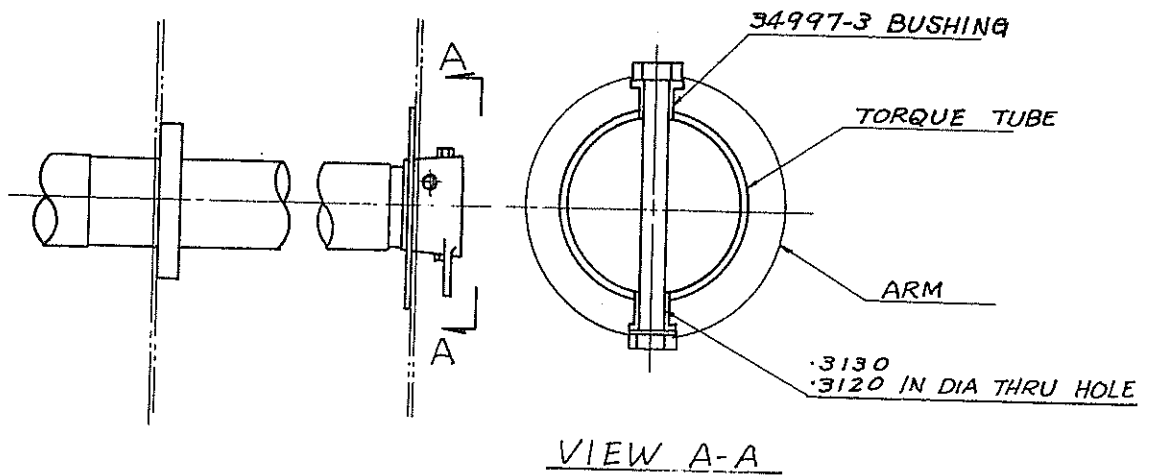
ILLUSTRATION OF BUSHING INSTALLATION
